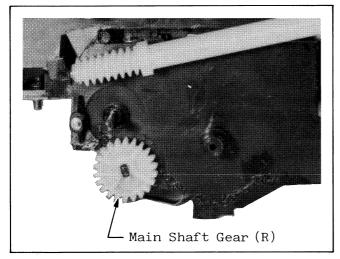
Adjustment of Cassette Up Gears-(2)
